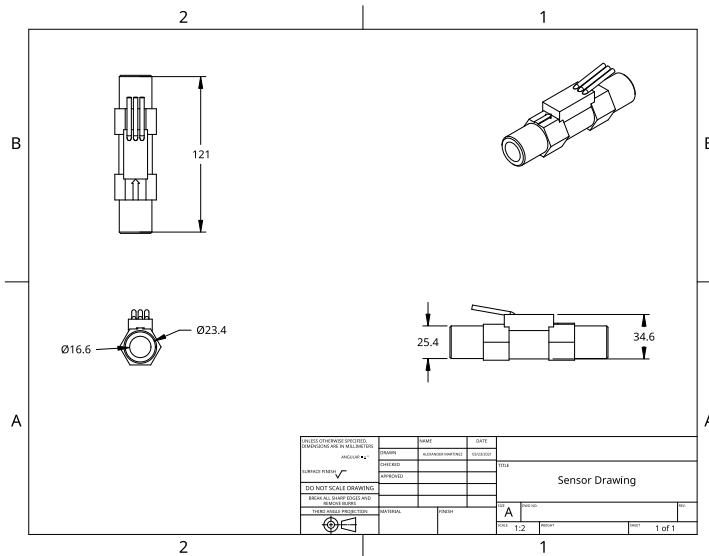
YF-B6 FLOWMETER DETAIL DRAWING
